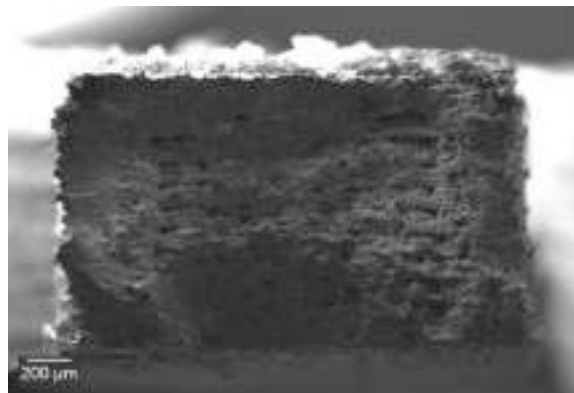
Fracture surface of 9.1 sample showing reduced porosity.
